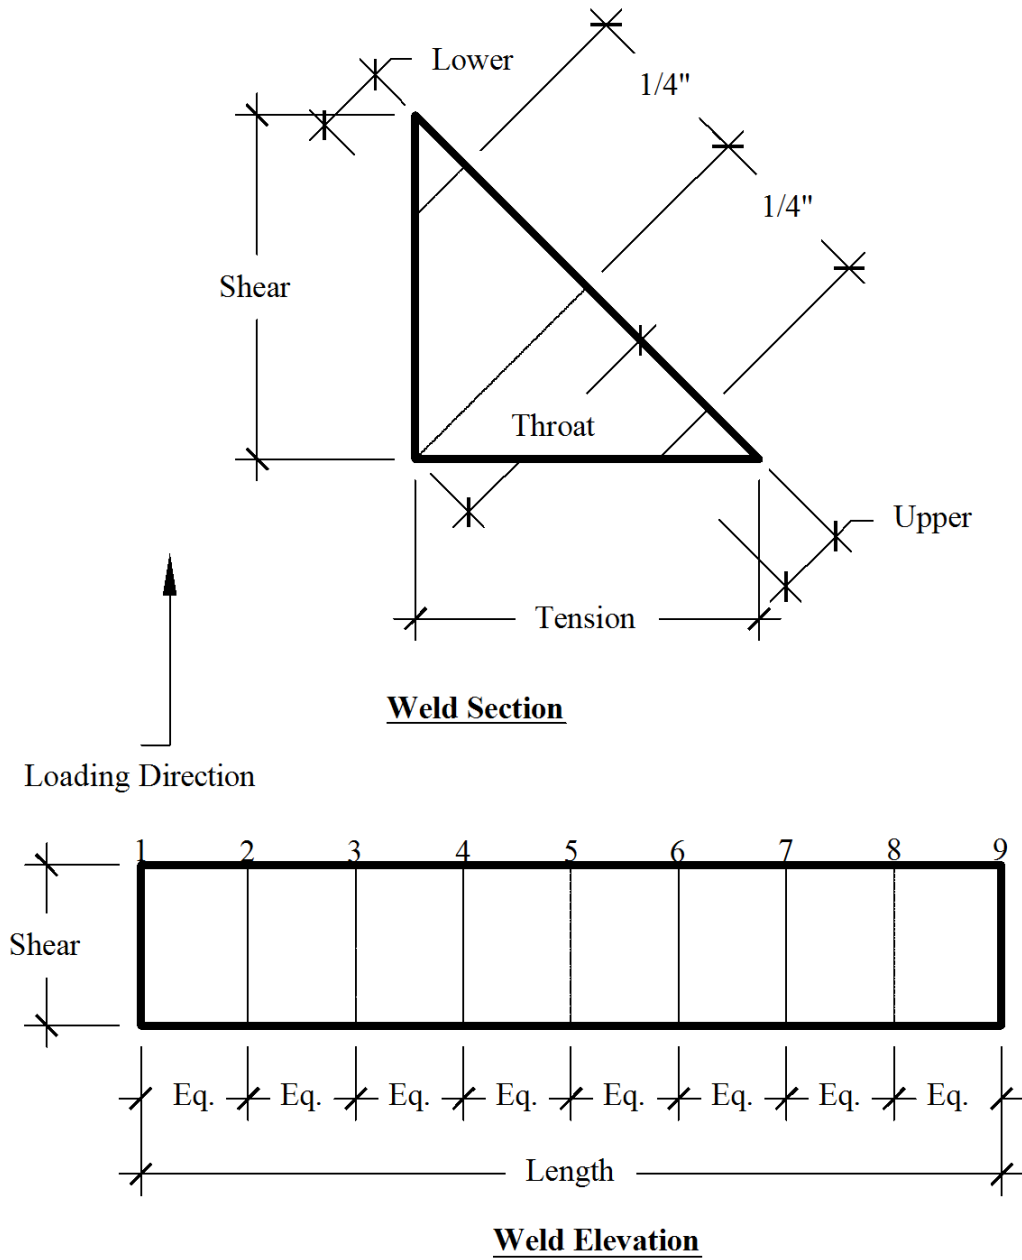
(a) Weld Section Schematic Showing Shear Leg, Tension Leg, Upper, Lower, and Throat Measurements (b) Weld Elevation Schematic Showing Location of Nine or Eight Pre- and Post-Fracture Measurements¹
